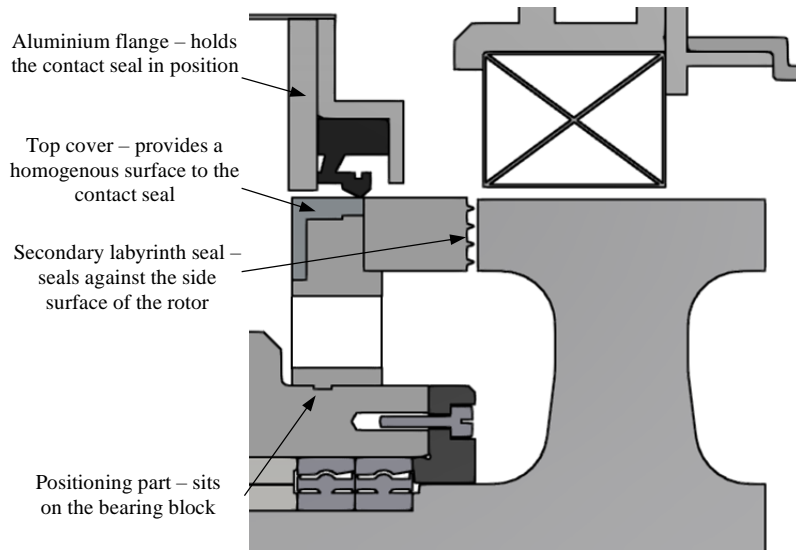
Close-up view of the secondary labyrinth seal and the contact seal as mounted in the rig.
